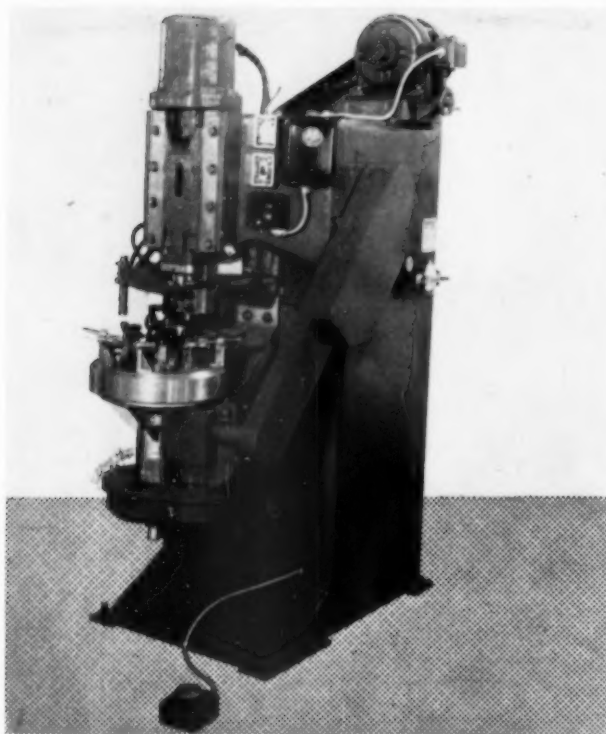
Welder equipped with dial feed to increase production rate.
